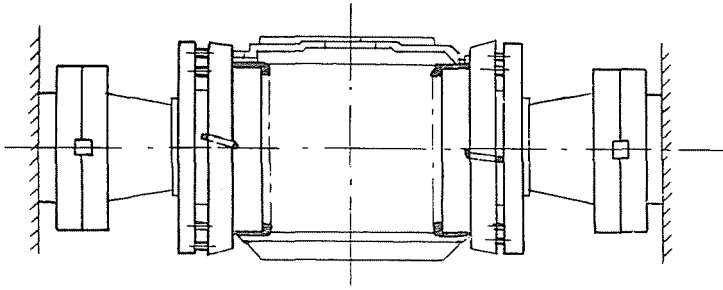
Diagram of machining on Type CD 1 Single-Purpose Machine
